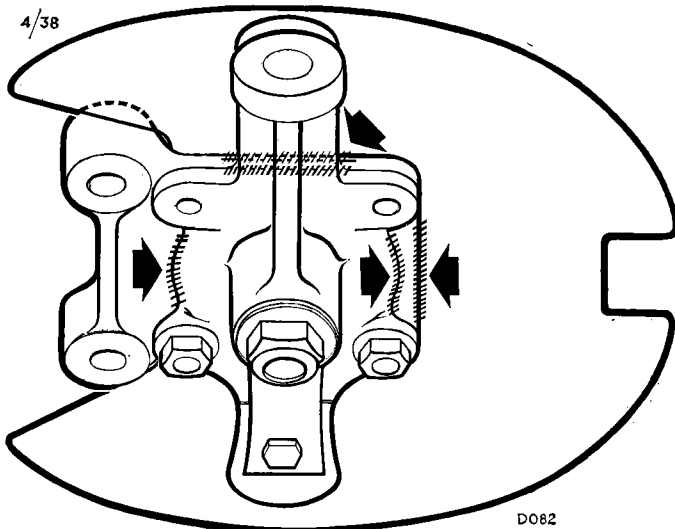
Positions of Expandite Seal-a-Strip between disc brake caliper bracket and vertical link
